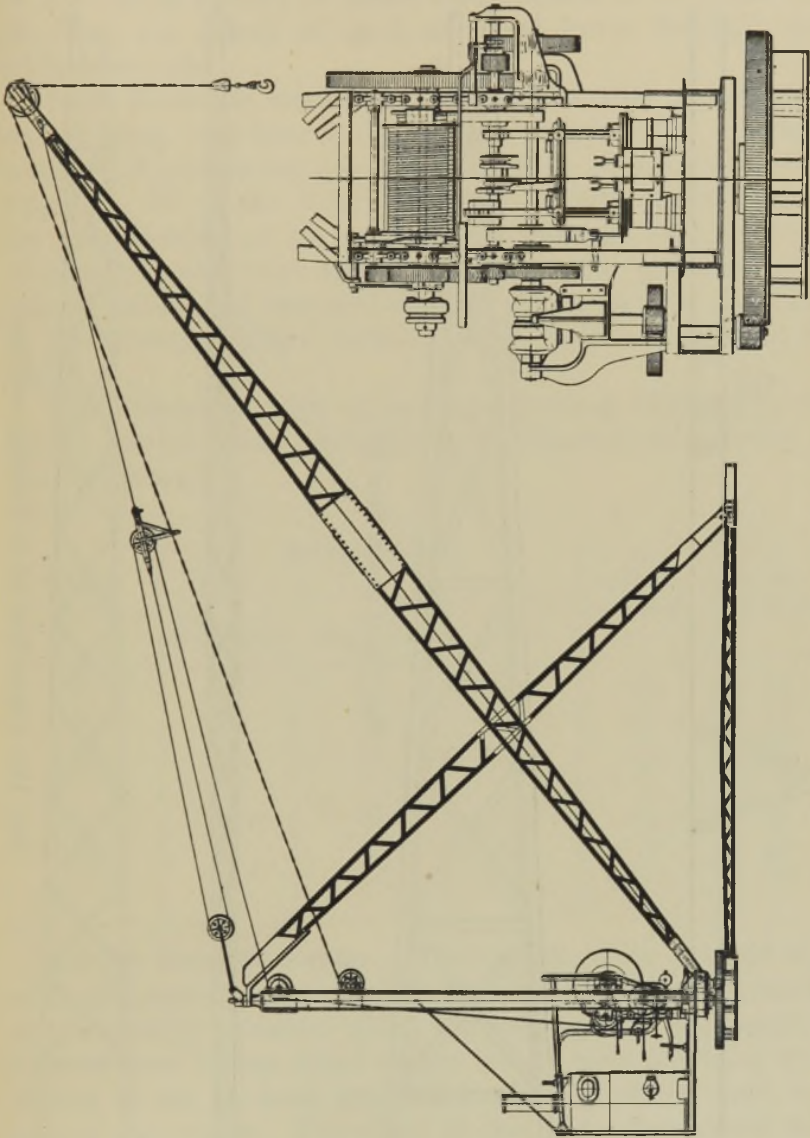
General Drawing of Steam Derrick Crane. (Butters Bros. & Co.)
